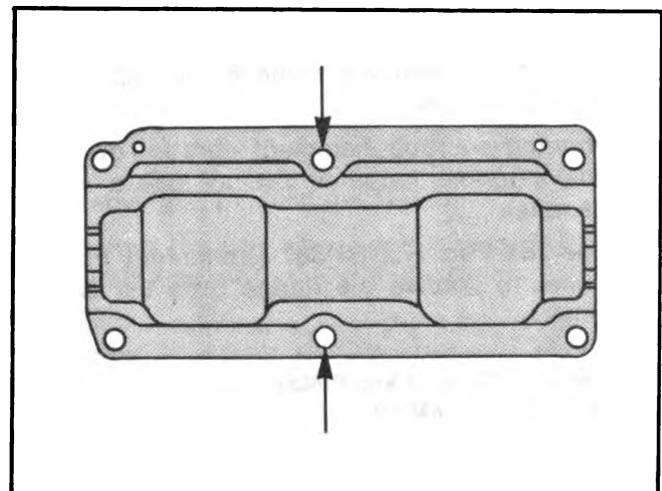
Remove These Capscrews From The First And Third Housing.
